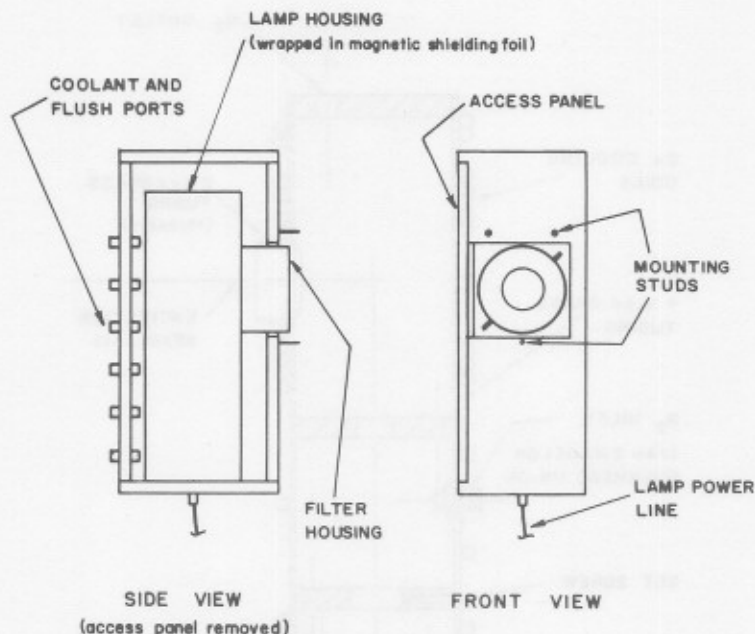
Lamp module front and left side views showing the positions of the lamp and filter housings. Tubing connecting the entrance and exit parts to the housings is not shown. Total module height, 16 in.; total module width, 6 in.; total module depth, 8 in.
